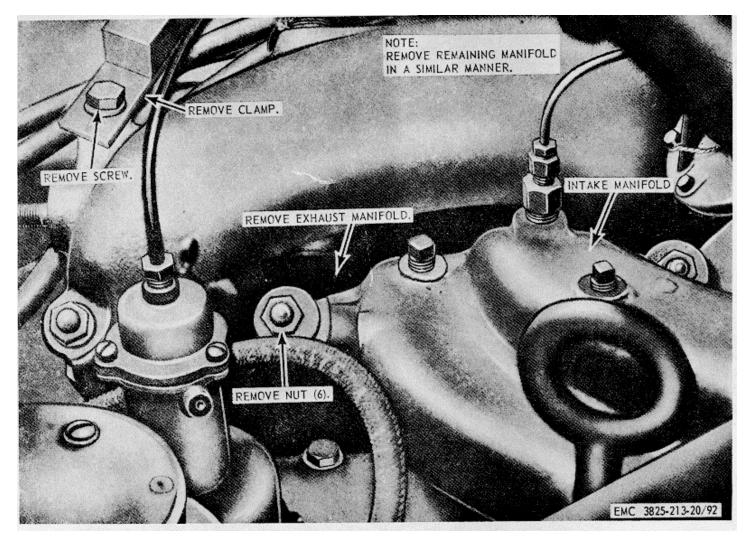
Plow and carrier engine exhaust manifold, removal and installation.
